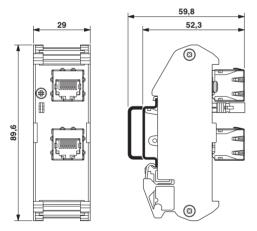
Dimensions of FL-PP-RJ45/RJ45
